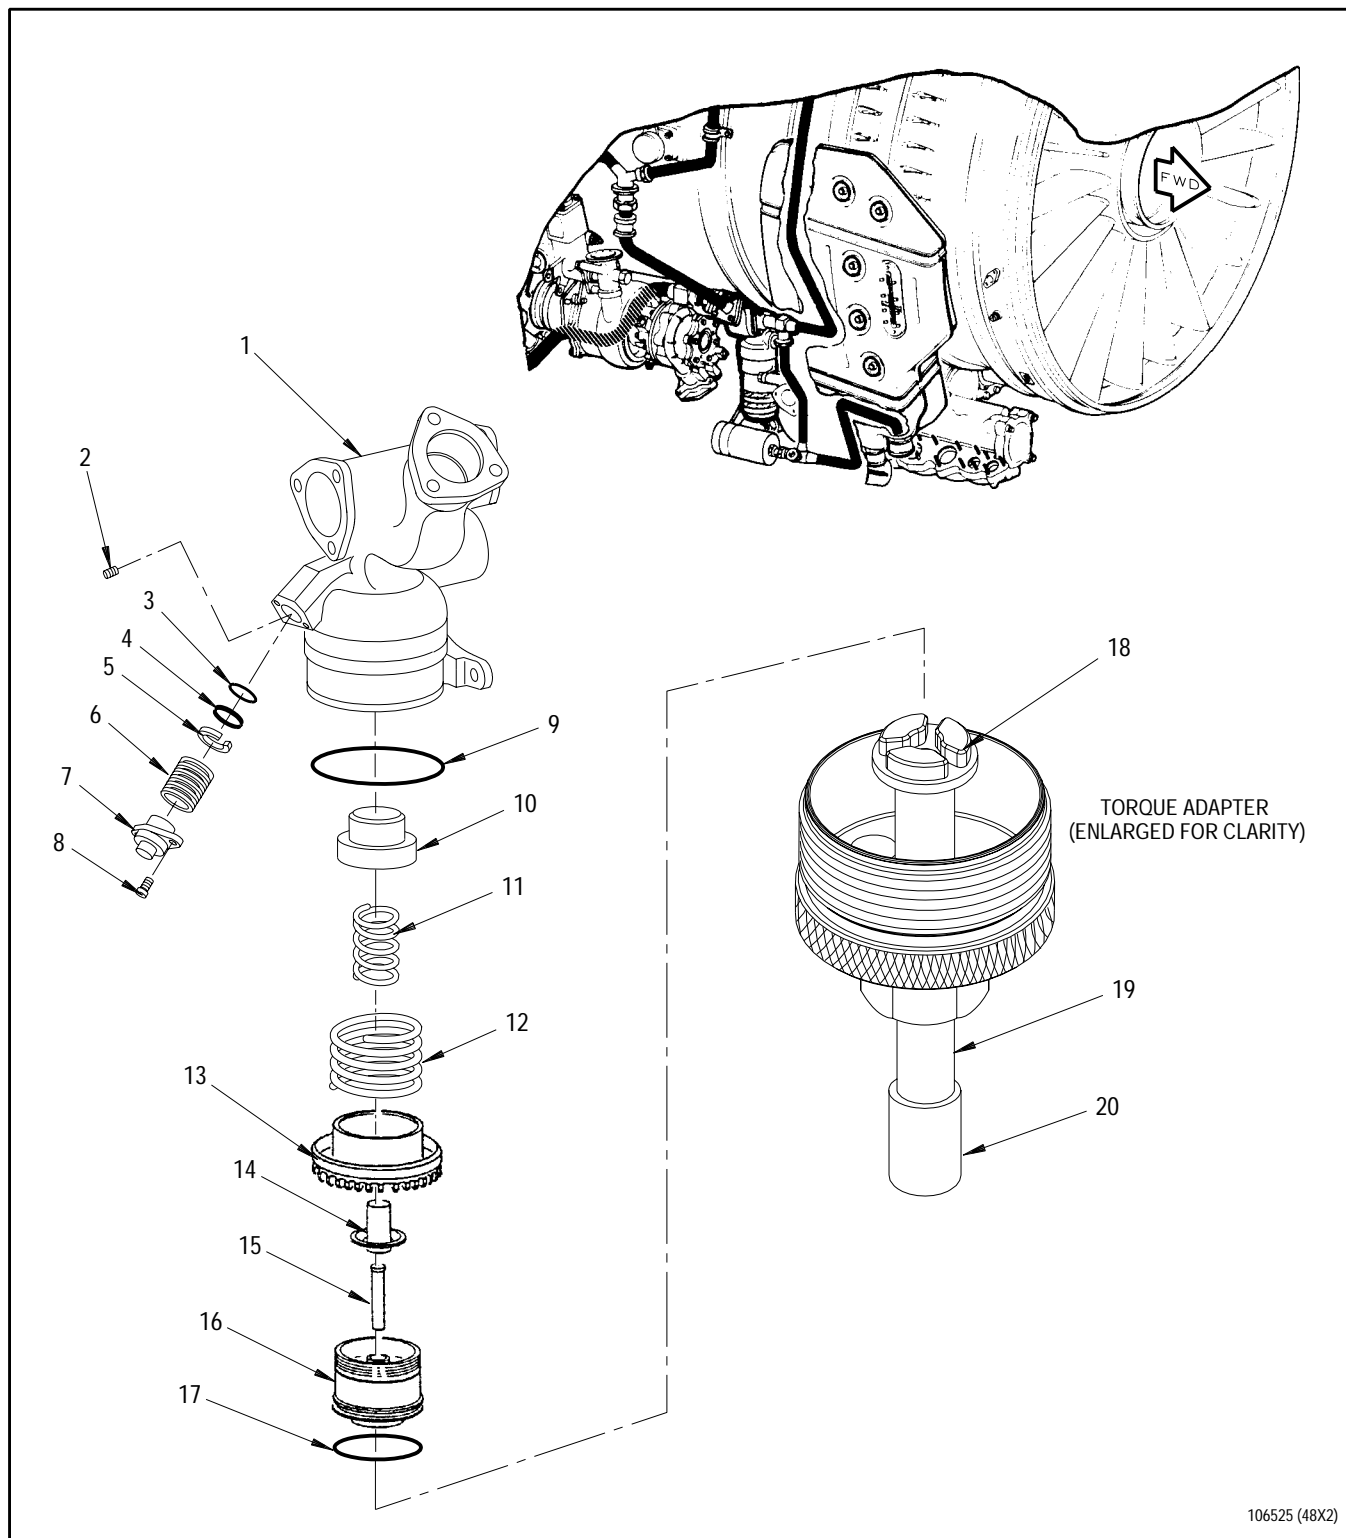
A. Oil Filter - Torquing Loose Components in Filter Head Assembly
